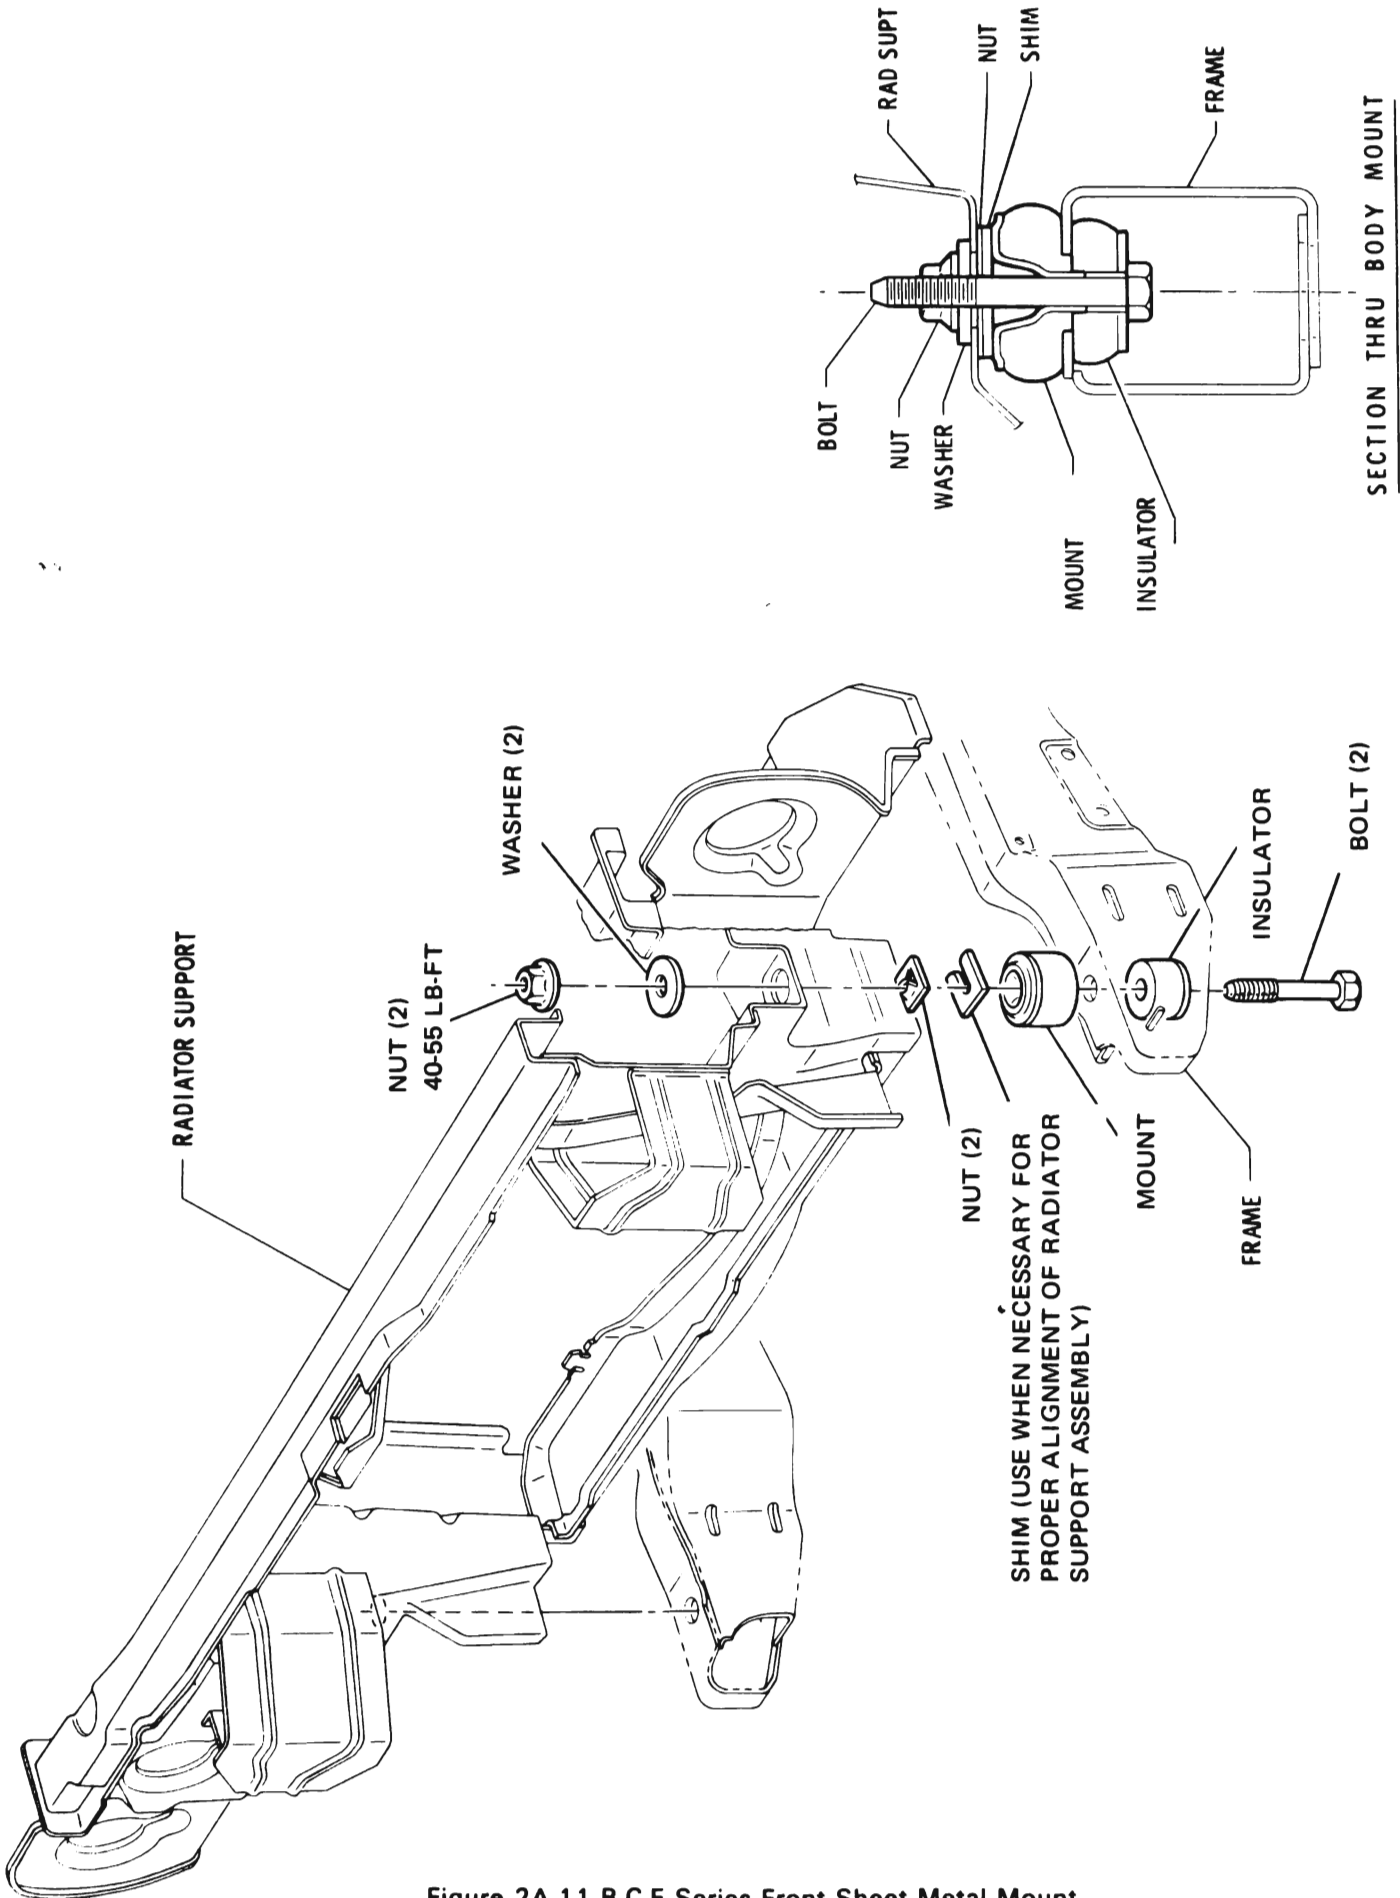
A-11 B-C-E Series Front Sheet Metal Mount
